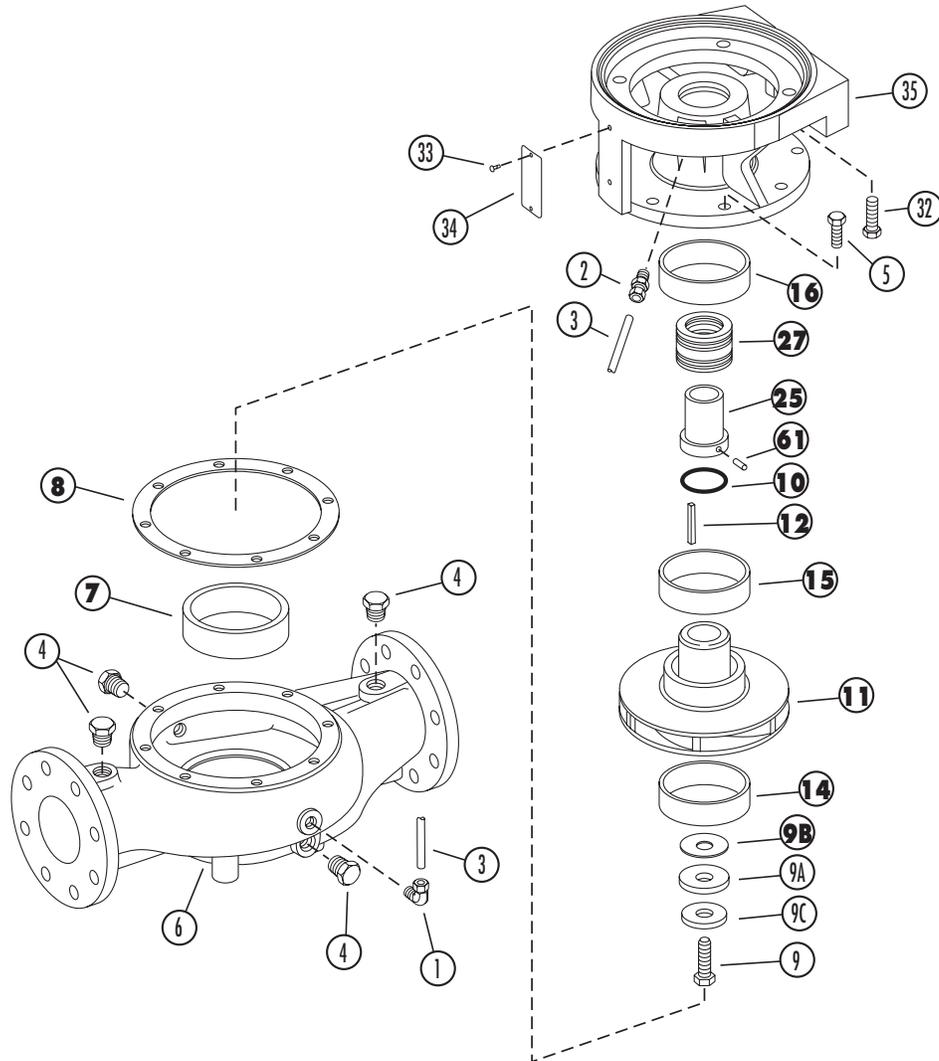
Model 1590 Exploded View. Boldface numbers indicate recommended spare parts.
